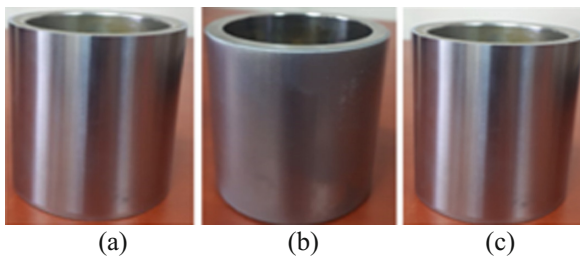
(a) Workpiece A applied turning (b) Workpiece B applied chromium plating (c) Workpiece C applied grinding
